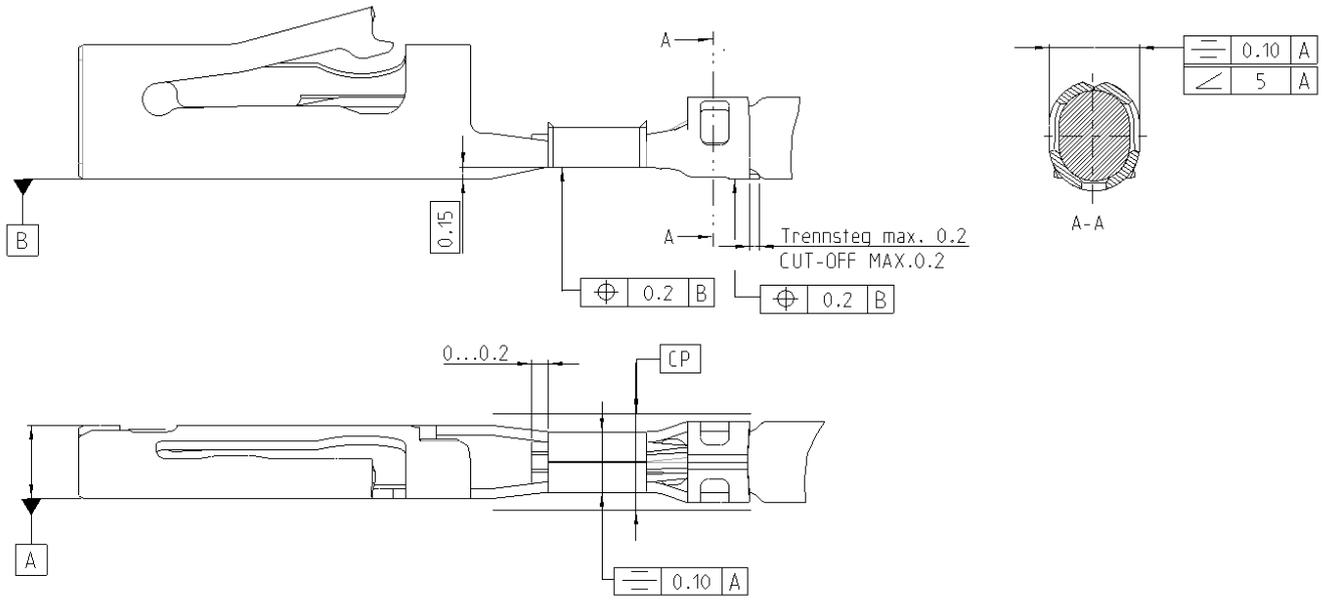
/ Abb. 6 Shape and position tolerances / Form- und Lagetoleranzen PN 2287720
